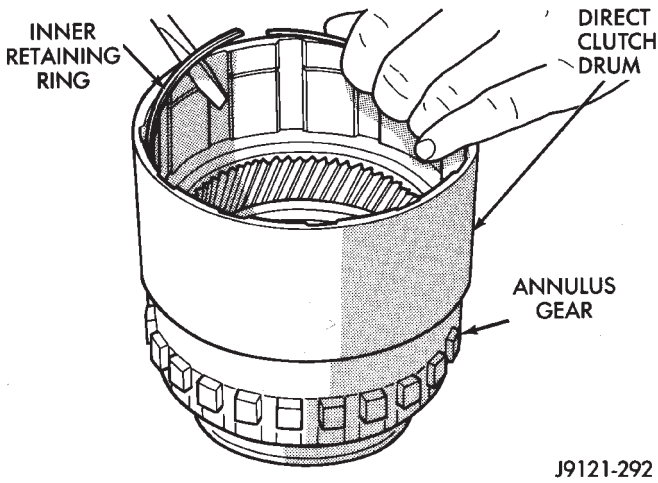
Removing Clutch Drum Inner Retaining Ring
